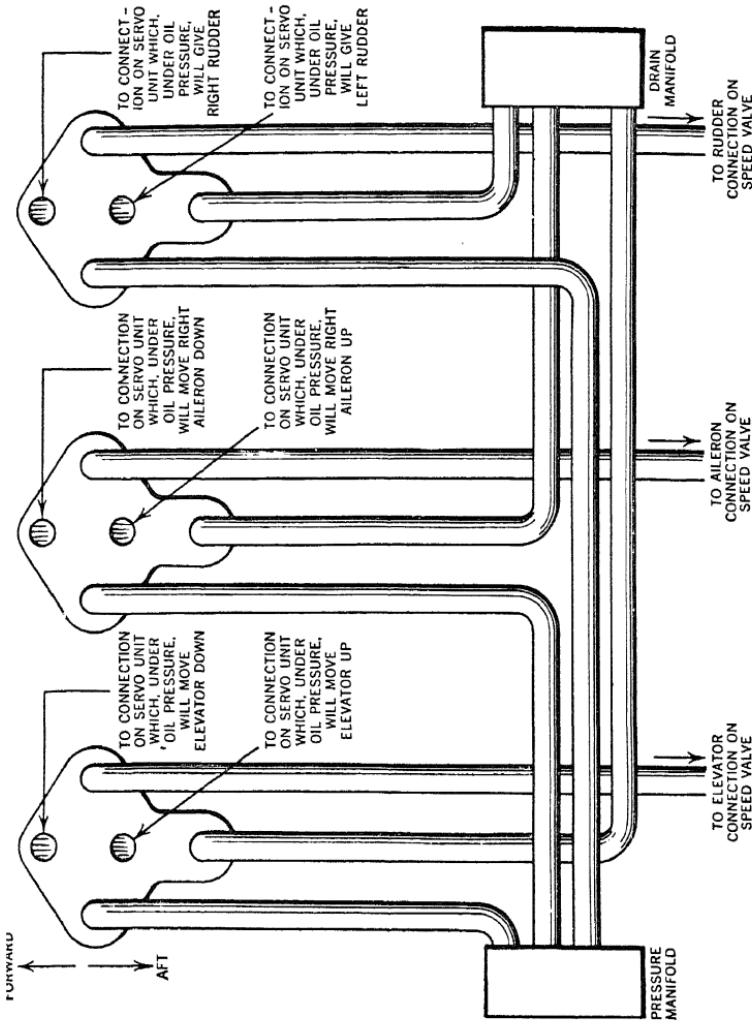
Diagrammatic Drawing Showing Method of Making Oil Line Connections to Balanced Oil Valves
